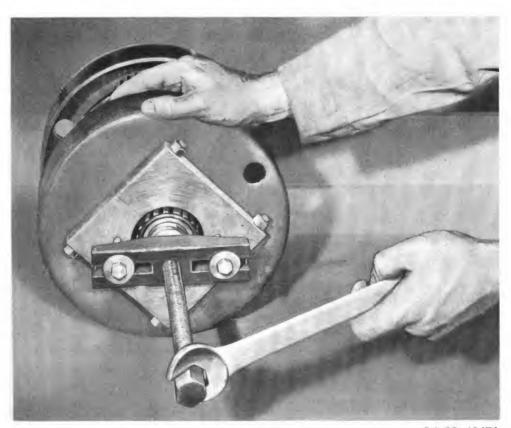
Removing Axle Transmission Rear Cover Plate and Pinion Rear Bearing
